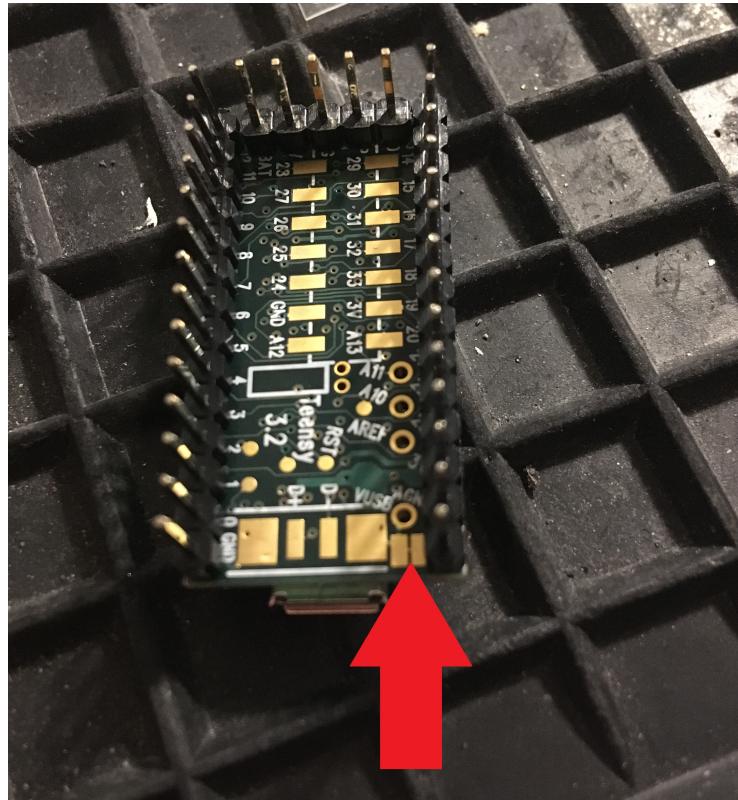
Now take it back out of its socket and cut this trace with a knife or anything, this is so that the USB socket will NOT power the Teensy. Only the Eurorack power will be able to power the Teensy board.
